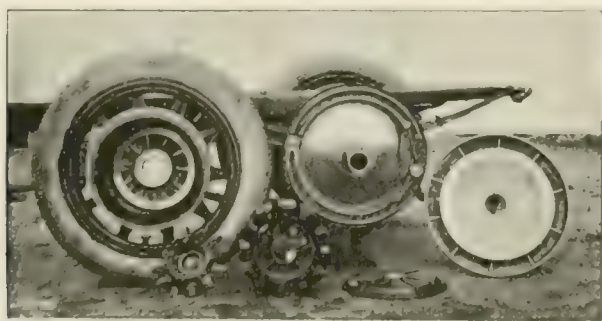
MERCEDES PETROL-ELECTRIC SYSTEM. VIEW OF ONE OF DRIVING WHEELS DISASSEMBLED.
